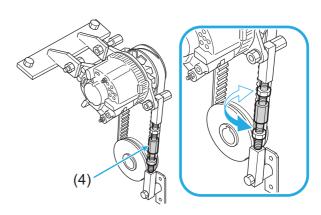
Belt Tension - Adjust (Turn Buckle)
